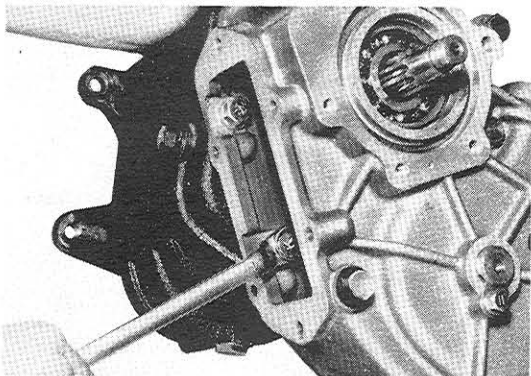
Removing Transfer V0436 Case Retaining Bolts
